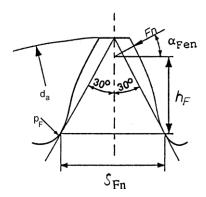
Dimensions of h_F , s_{Fn} and α_{Fen} for external gear
